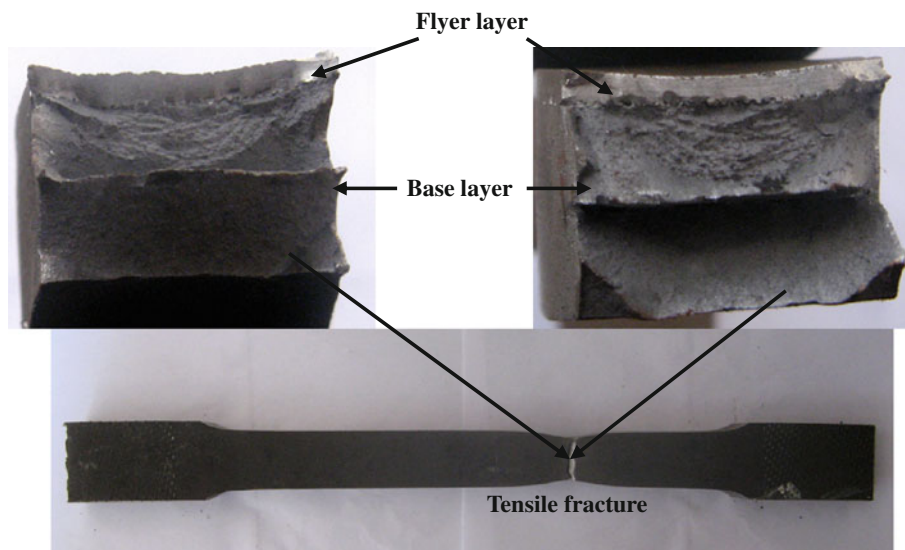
Views of the samples after tensile tests: this picture shows the tensile sample and its fractures. And it can be seen from the fractures that no departure is observed in the interface of cladding plate
